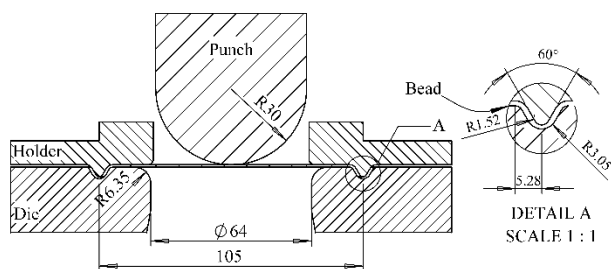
Hemispherical punch test schematic (dimensions are in mm).
